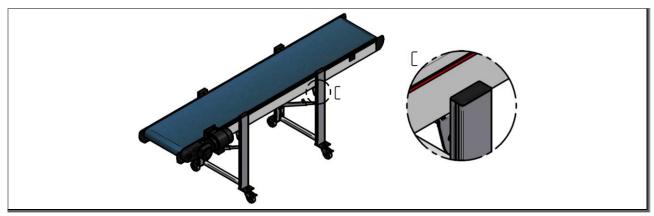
Overall construction assembly conveyor with support HE 030 - HM 260 (typical)
